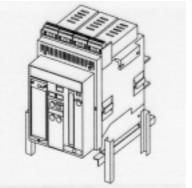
/1 Circuit-breaker mounted on a horizontal support
